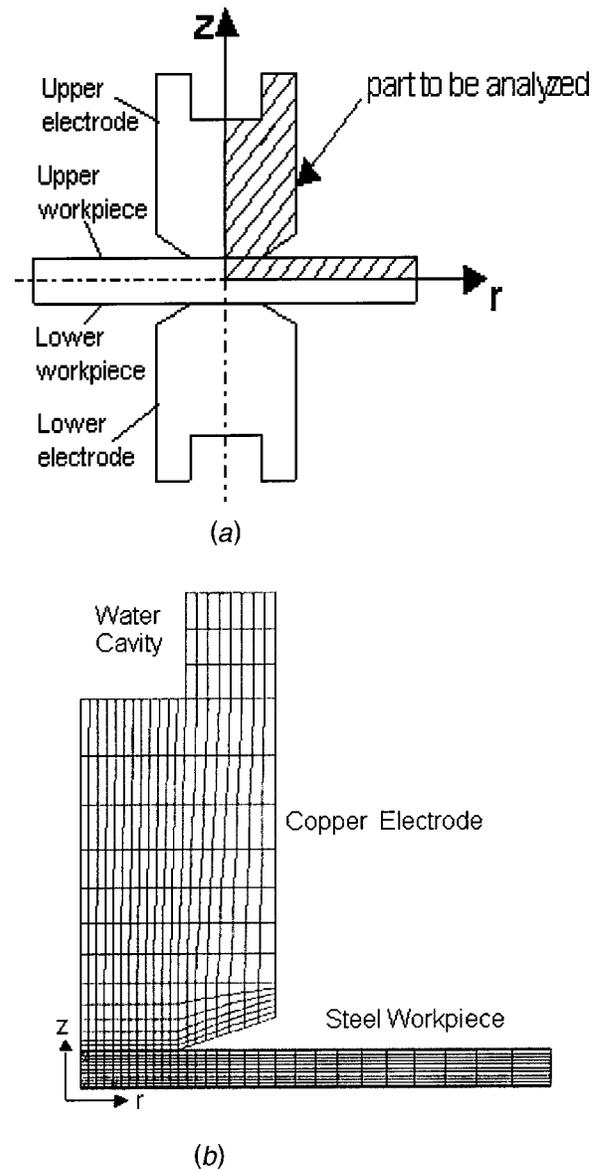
(a) Axisymmetric mode of spot welding setup (b) Finite element model for spot welding
